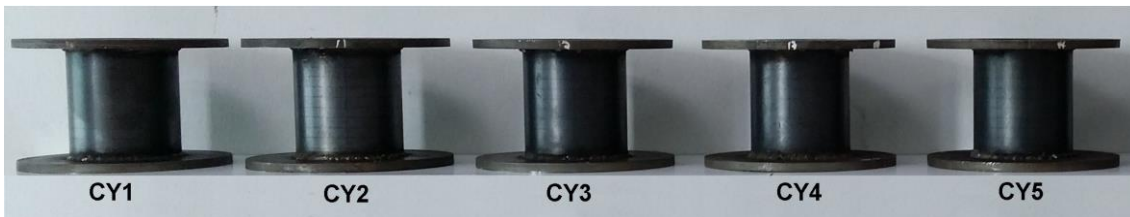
Photograph of MIG welding cylinders with top and bottom flanges.
